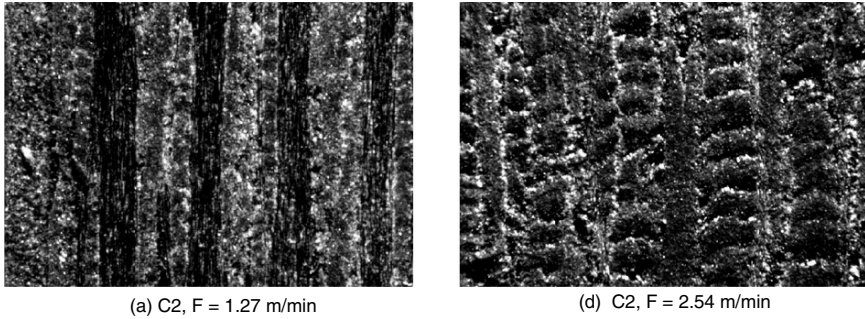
Topography of the machined surface after end milling of CFRP with four flute helical cutter. Direction of cutting is from bottom to top of pictures. Tool diameter = 7.9 mm, spindle speed = 2,500 rpm, depth of cut = 1.0 mm [18]. Reprinted with permission from SAE Paper # 2002-01-1526 © 2002 SAE International
